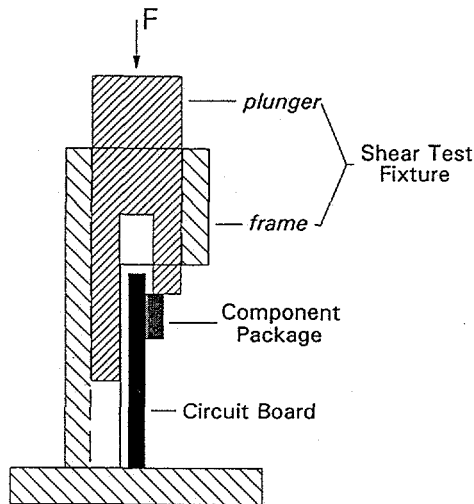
Jig used to shear test the chip capacitors and SM-1 component package from the circuit board.
